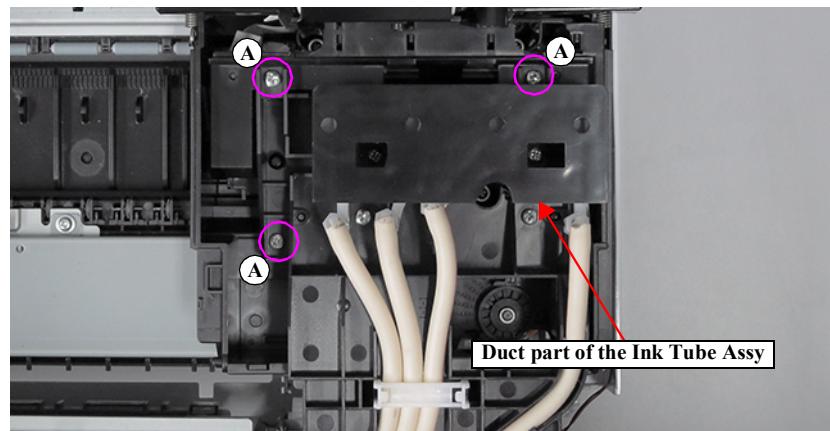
Removing the duct part of the Ink Tube Assy (1)
